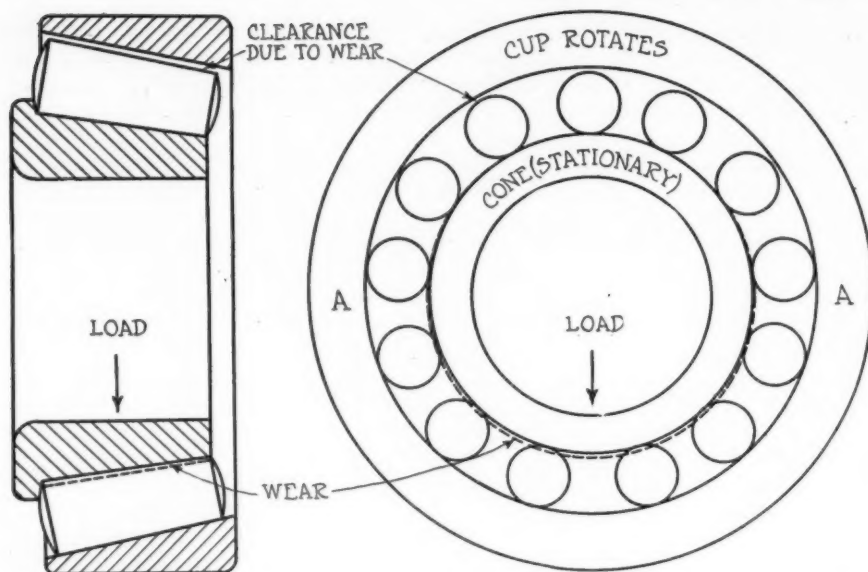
Showing the functions and clearances of the different members of a taper bearing which has undergone wear. Clearance Due to Wear—Clearance between cup and rolls due to wear of lower surface of cone. Wear—Dotted line indicates original shape of cone before wear has occurred. Any attempt to adjust for wear produces pinching of rolls amounting to a maximum at points A and correspondingly less at other points
